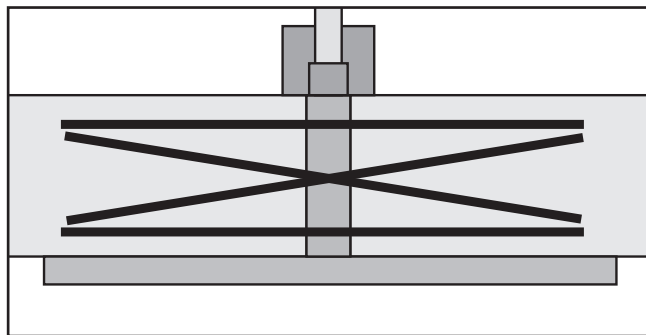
Straightedge positions for checking infeed/outfeed table parallelism.
